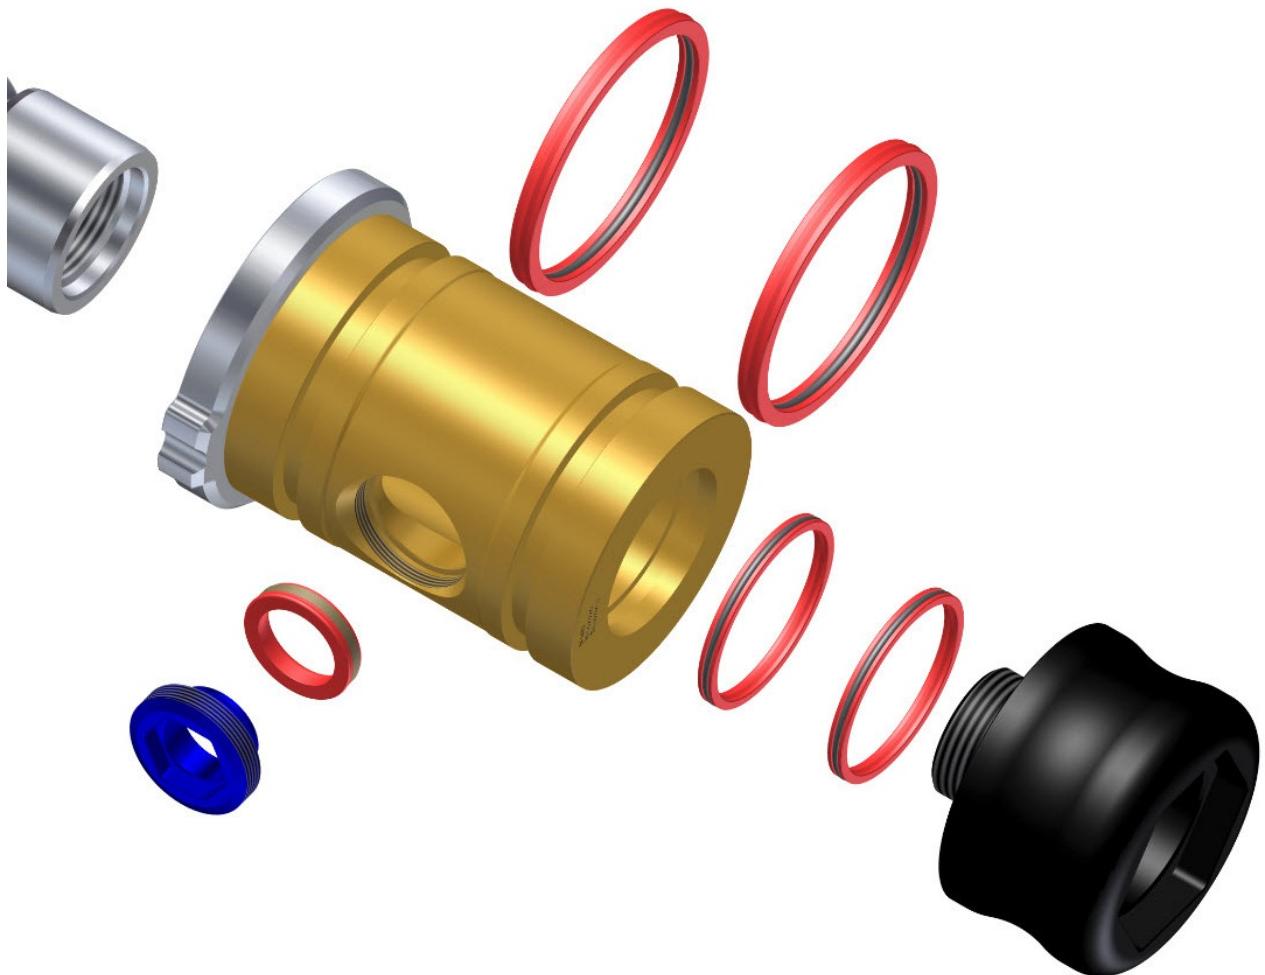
Valve Stab™ Seal Carrier with internal and external seals
